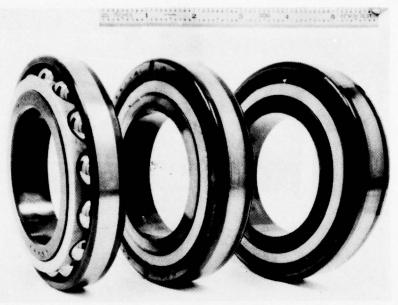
Main input triplex bearing after 25-minute loss-of-lube test of optimized transmission configuration number 1.
